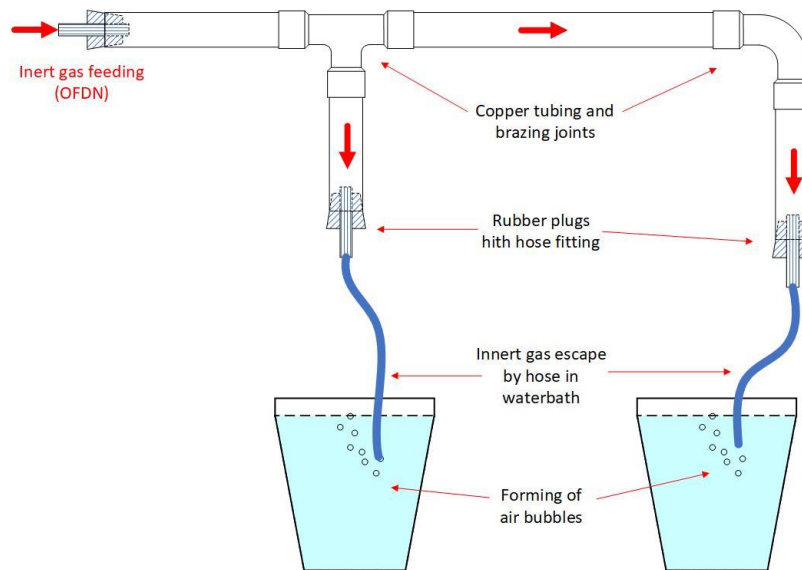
Exemplary arrangement for inert gas brazing (Source: HEAT GmbH)
